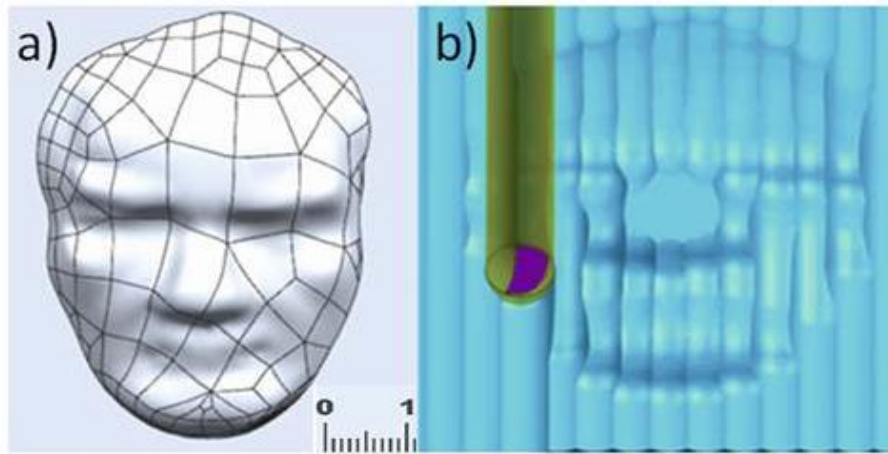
a) CAD model of freeform surface, b) CAM simulation and tool workpiece contact region
